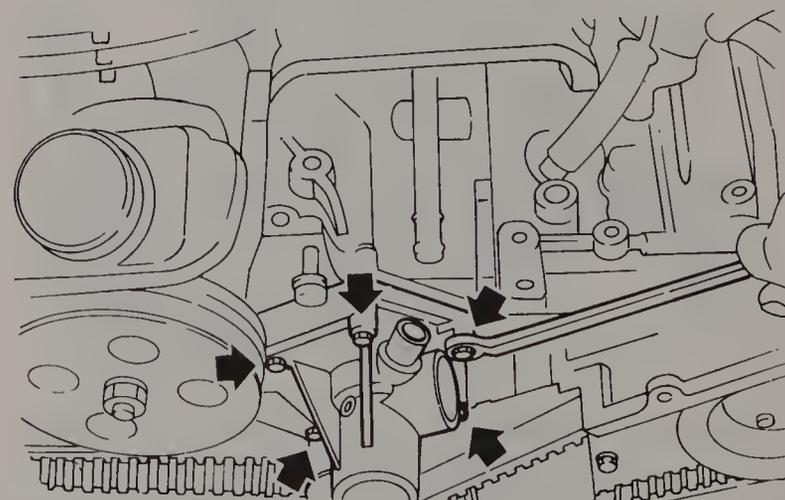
Water pump mounting bolts (arrows) (Sec 6)
